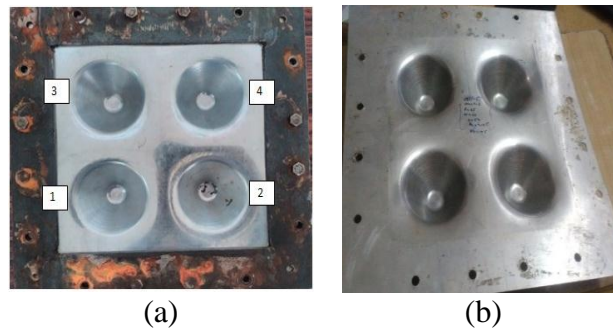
View of formed sheet (a) clamped position and (b) unclamped position
